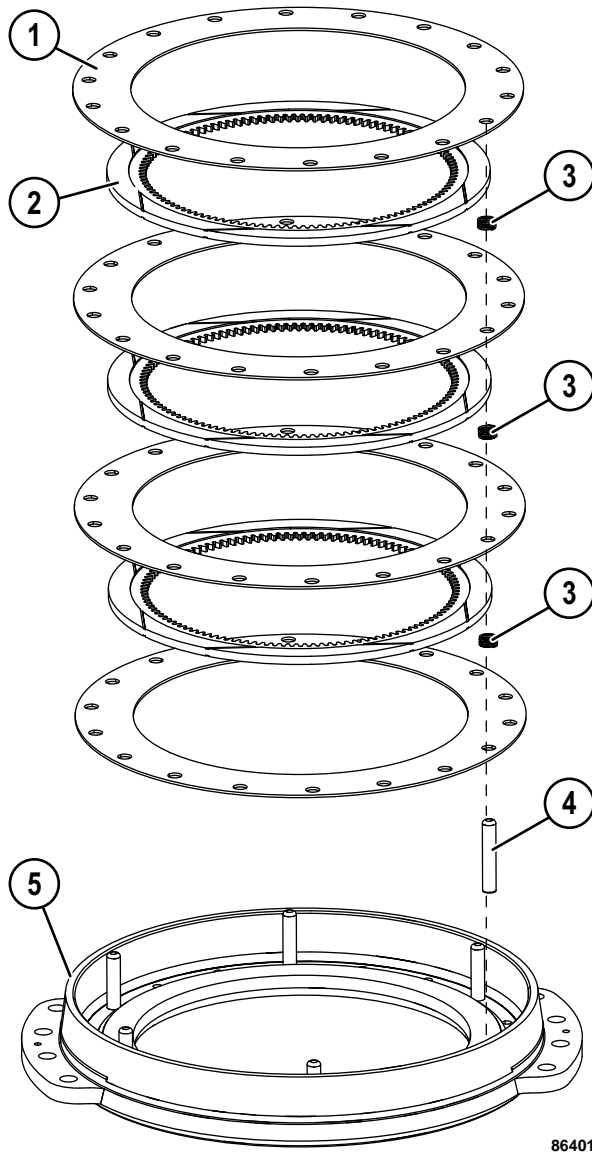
PARKING BRAKE DISASSEMBLY & ASSEMBLY
